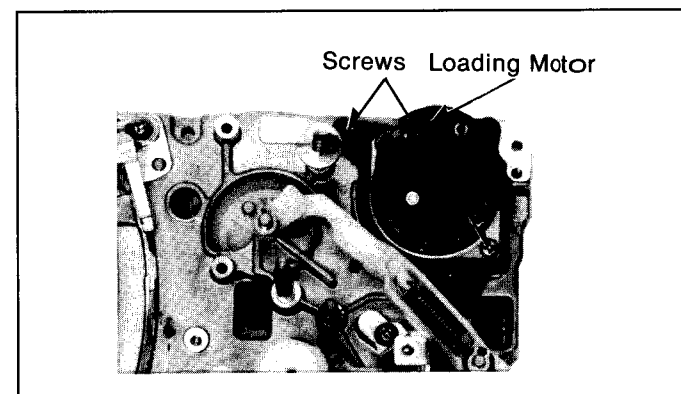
Assembly and Adjustment of Gears and Rod-(6)
